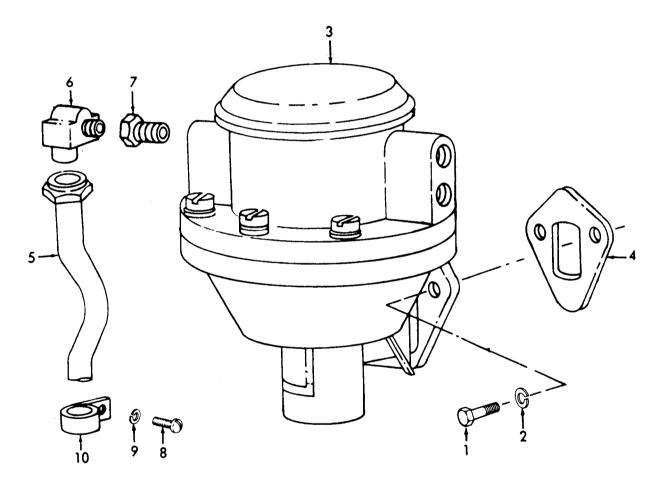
Fuel Transfer Pump, Removal and Installation.
